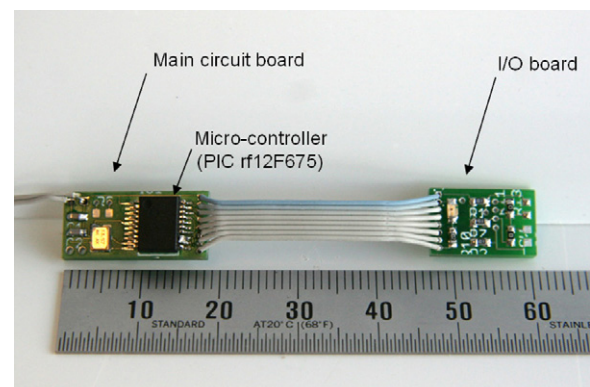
Photograph of fabricated microcontroller board and I/O board.
